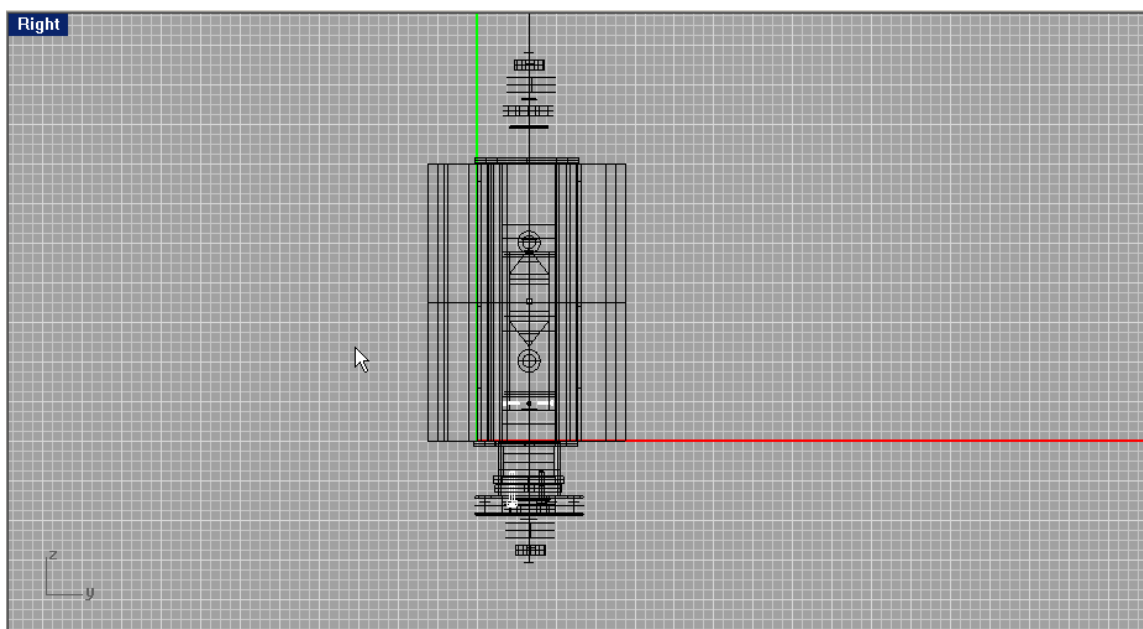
Right view of prototype switch w/ vacuum ion pump pod and magnetic plates.
